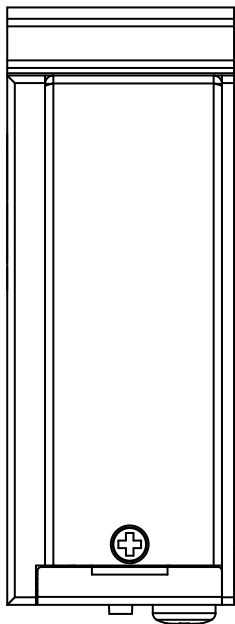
Device variant NA, top-hat rail mounting, top view
